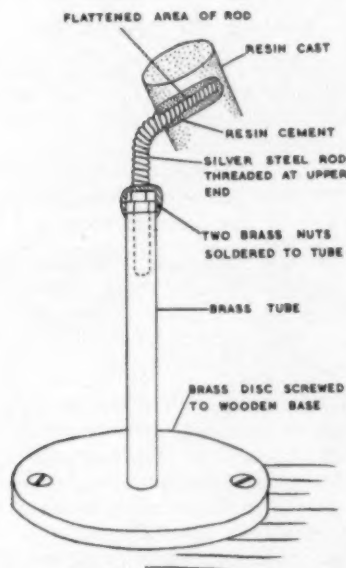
A typical mounting unit. Size of materials used in construction depends on weight of resin cast.
